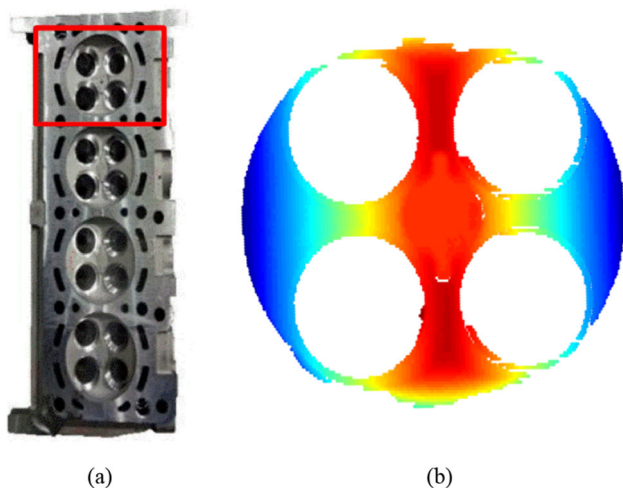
a Cylinder head combustion chamber, b Measured cylinder head combustion chamber
